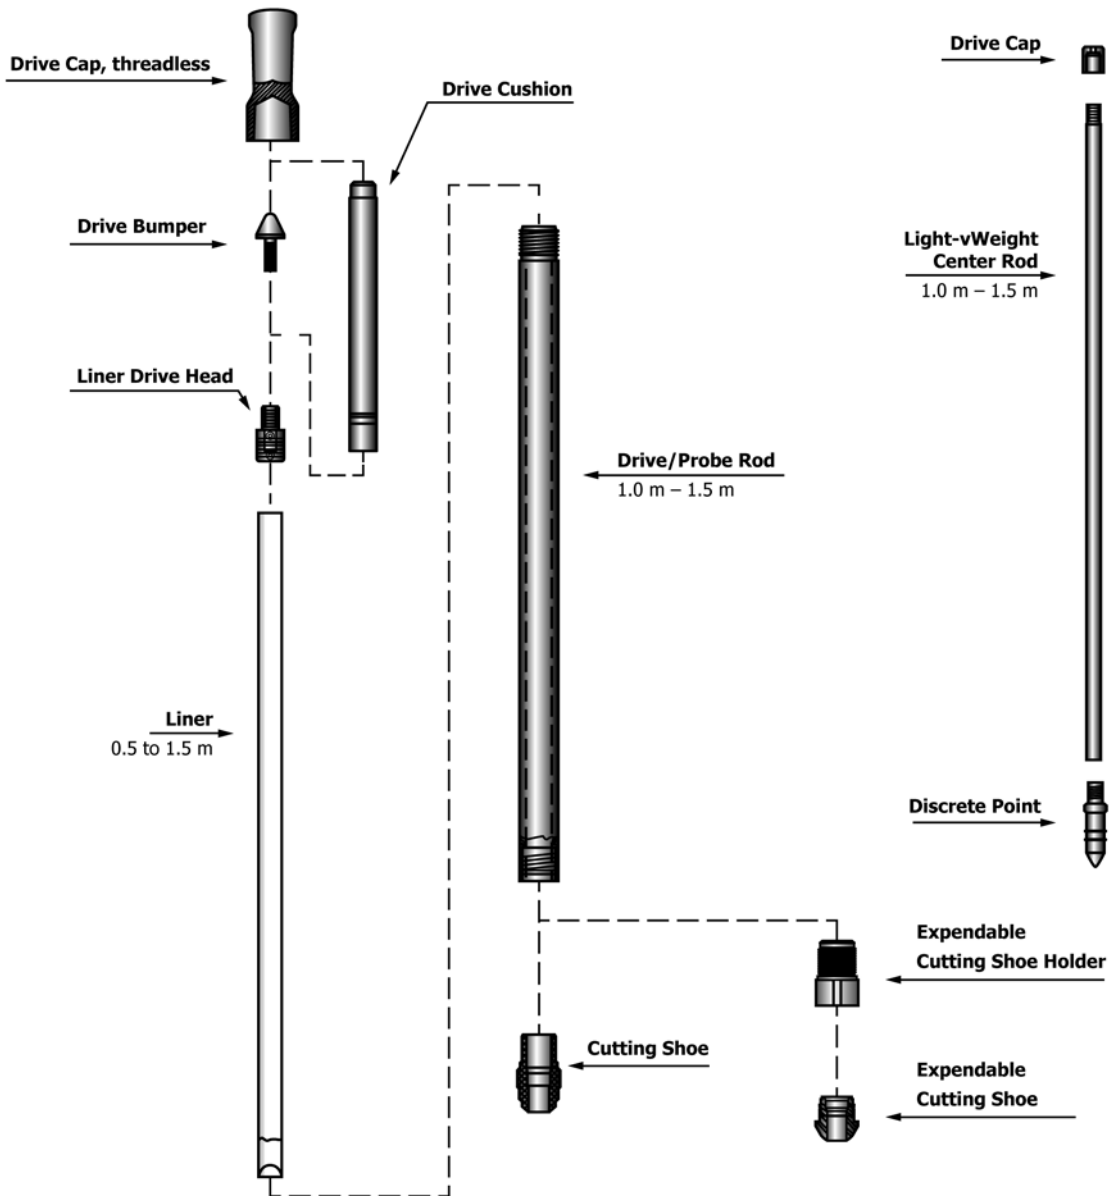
Dual Tube Sampler with Inner Liner and Inner Rods
